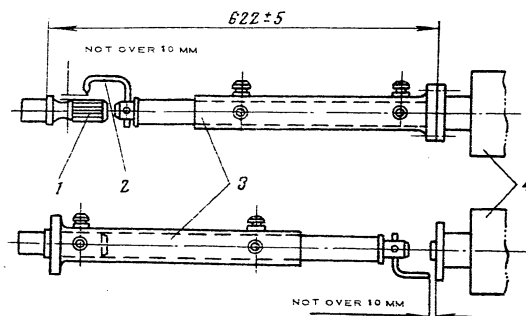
INSTALLATION OF APPLIANCE FOR CHECKING FAN UNIT SHAFT AND MAIN GEAR BOX DRIVE SHAFT FOR AXIAL ALIGNMENT
